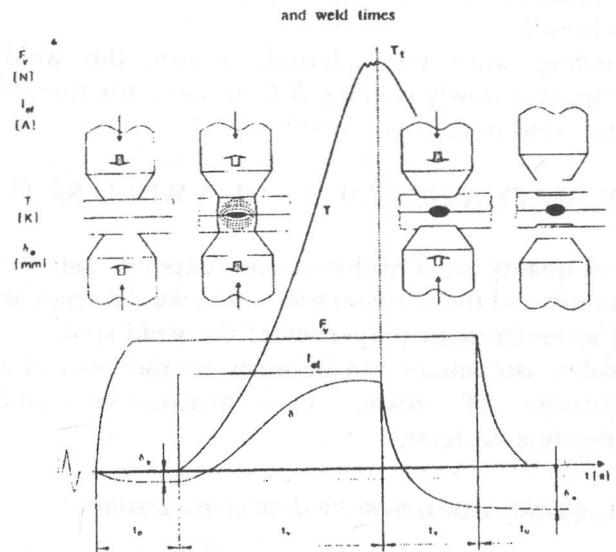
Welding cycle and operation within the cycle in resistance spot welding.
